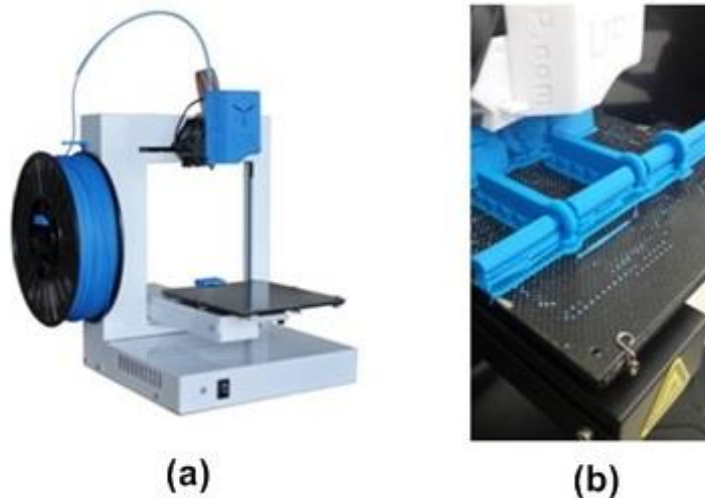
(a) Printer used in the build; (b) Printing the crank shaft.
